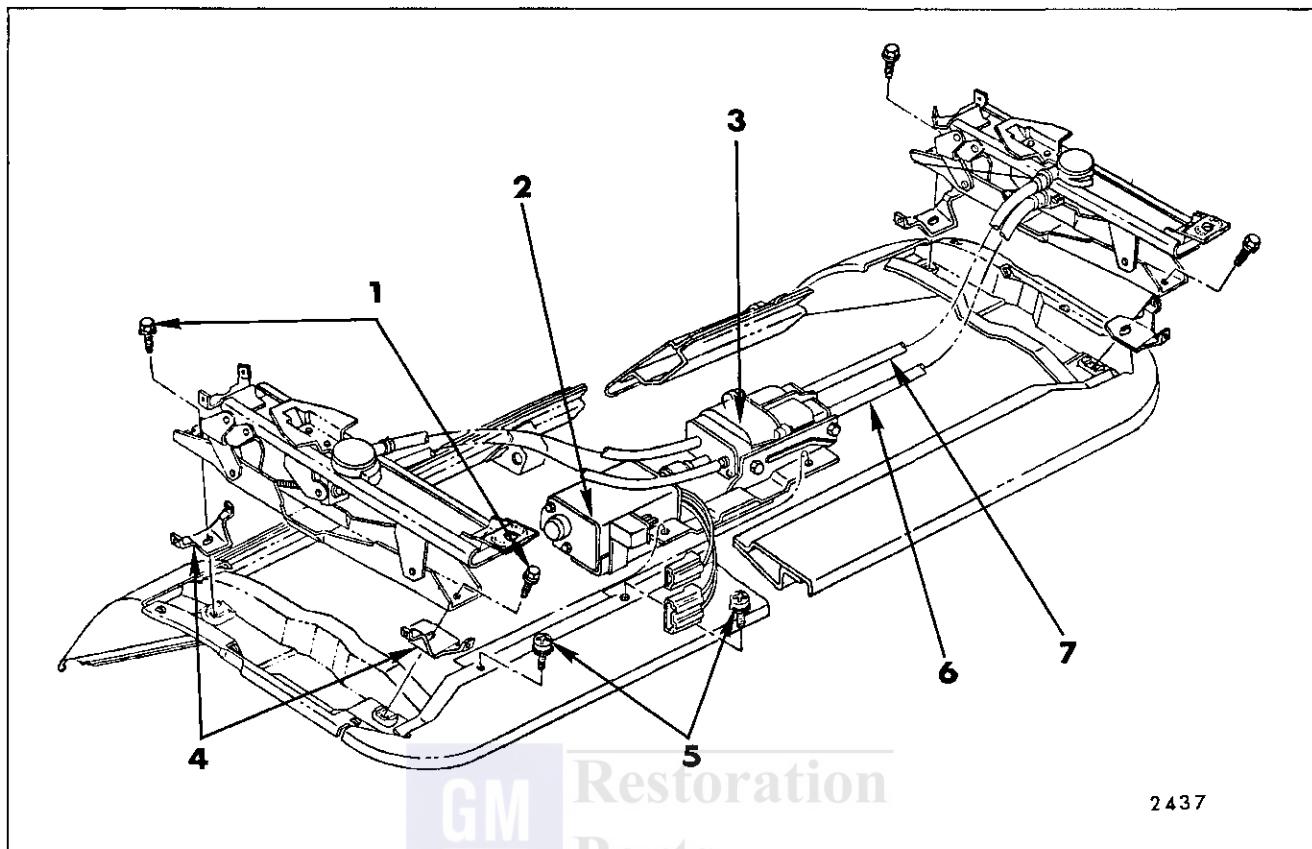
Front Seat Assembly — Four-Way Tilt — "A" Styles
